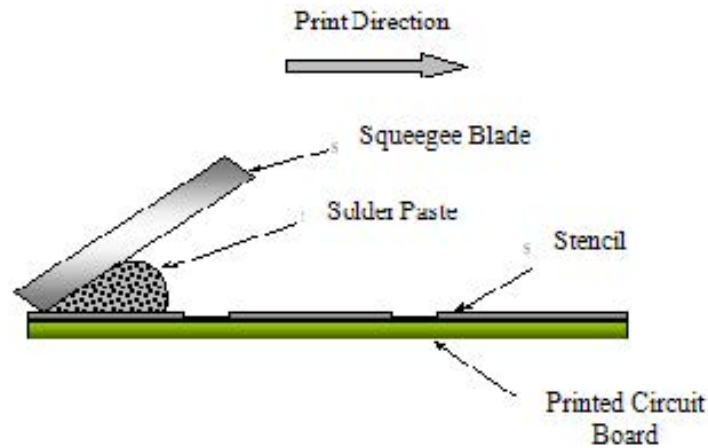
Squeegee printing solder paste onto a stencil [19].
